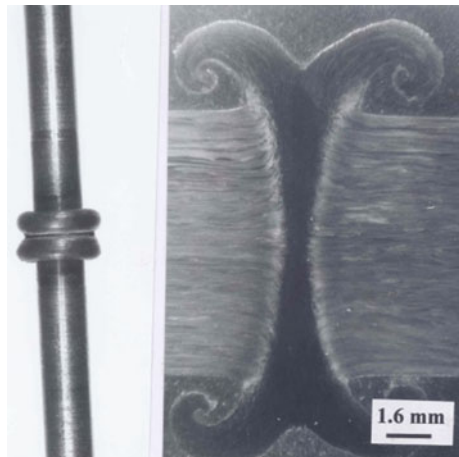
Ti₃Al friction weld [41]
